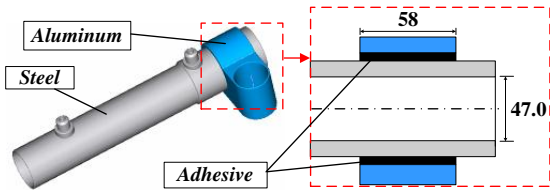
Redesigned feature of adhesively bonded power steering cylinder for light-weight
